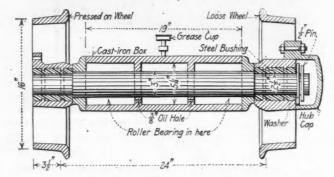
ASSEMBLY OF ROLLER BEARINGS AND WHEELS, RIGID-BOX TYPE
